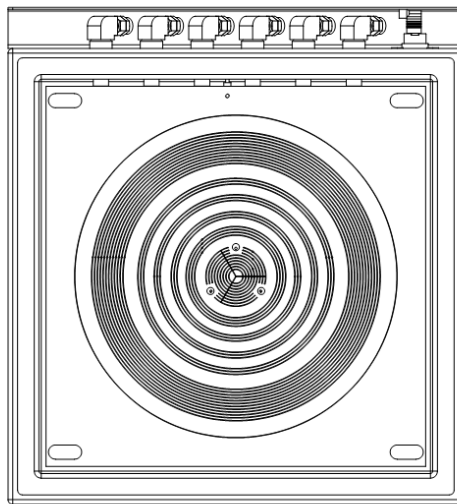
Apogee® Thermal Slide Debonder Platen Assembly
